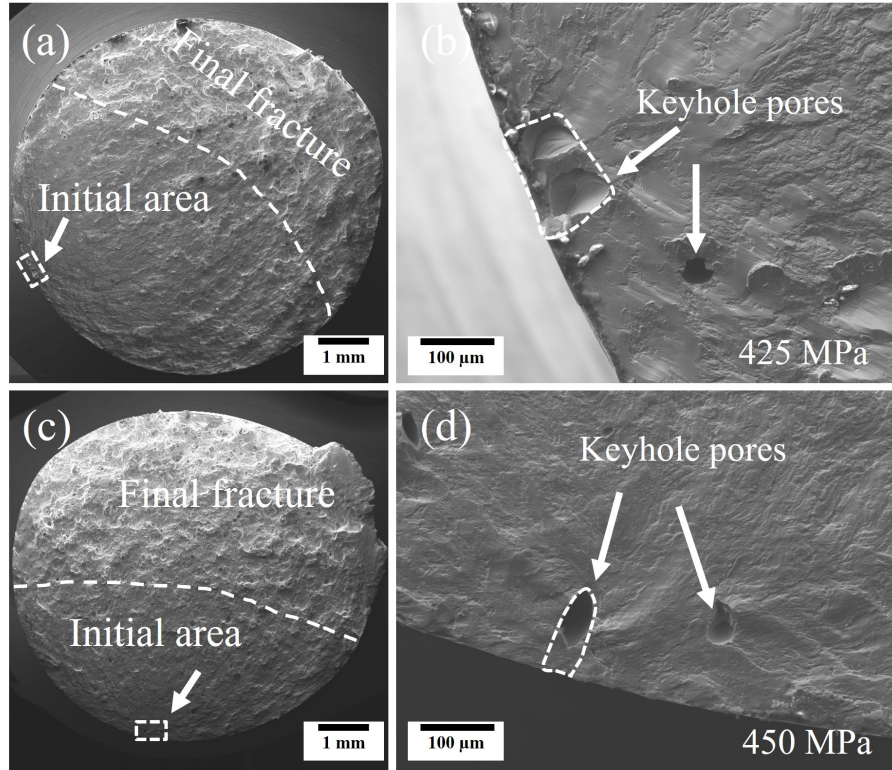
The fatigue fractography of P+AB specimens showing the killer defects for crack initiation.
